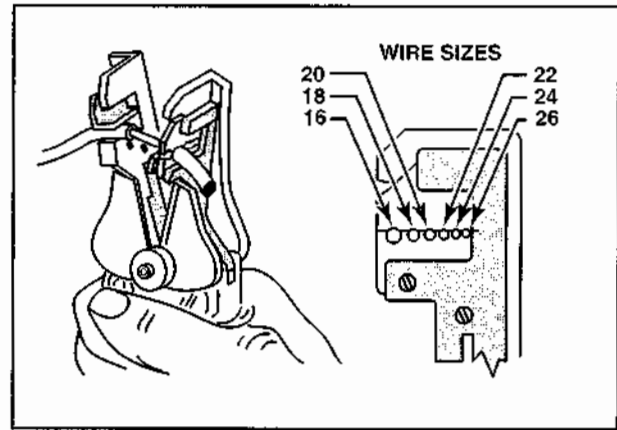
When stripping electrical wire, use a quality stripper that is designed for the specific type and size of wire.
